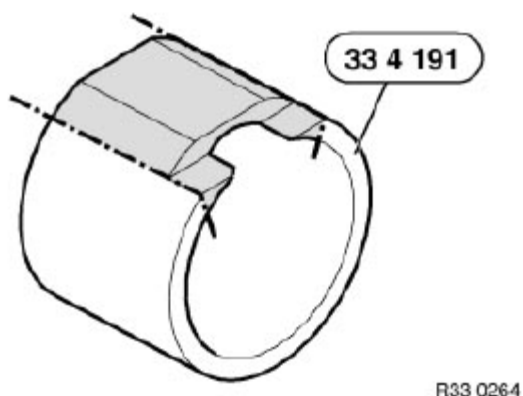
Identifying Special Tool (33 4 191) Cutting Area Location
